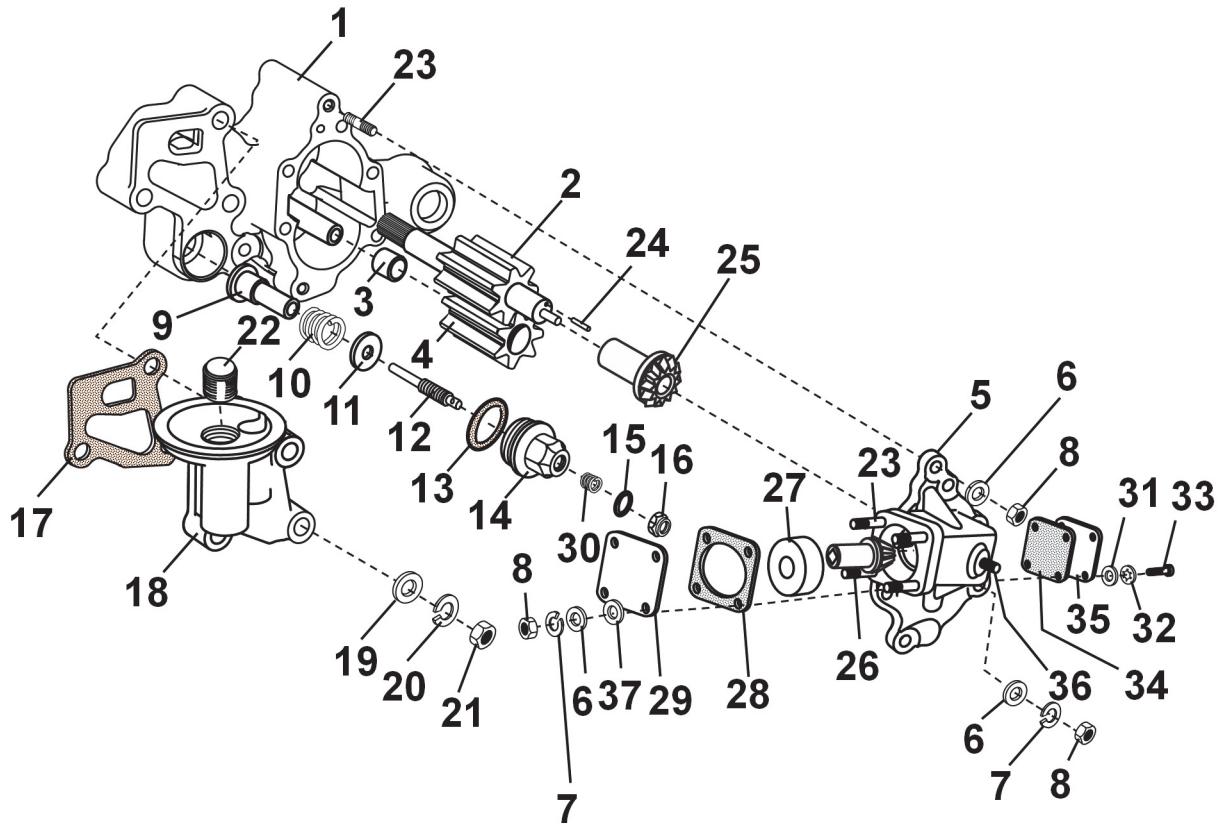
Oil Pump Assembly with Electrical Tachometer Drive Adapter
